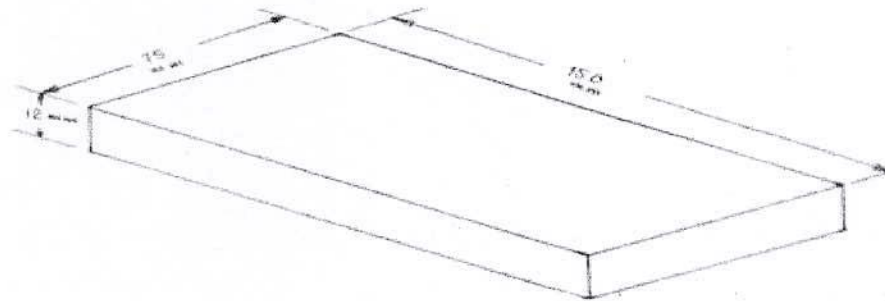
(a) Sketch of Specimen with Dimensional Configuration
